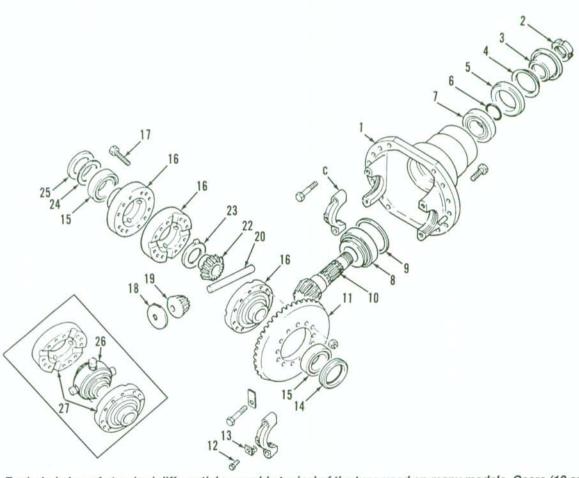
Exploded view of standard differential assembly typical of the type used on many models. Gears (10 and 11) are available only as matched sets. "Autolock" differential unit (26) is shown in Fig. 23.
